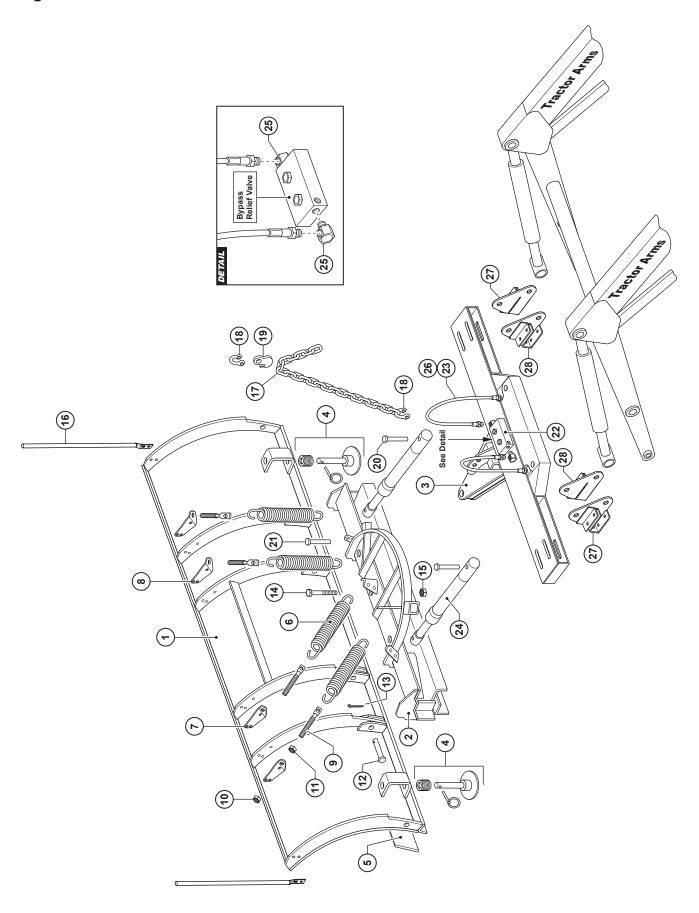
Front End Loader Blade Illustrated Parts List (continued)
